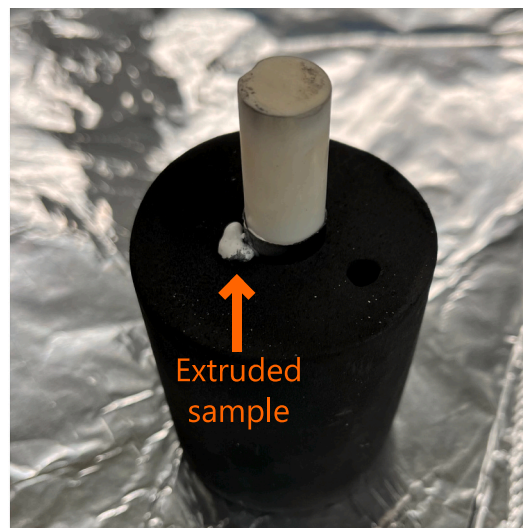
Die after hot-pressing at 1250 °C showing an extruded material.
